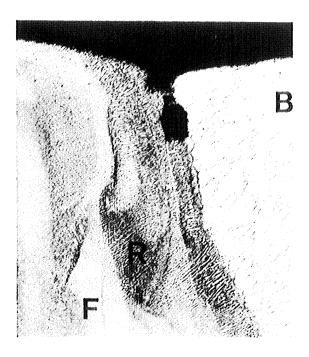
Metallographic section of pitting shown in Figure 4. Dark-etching (R) areas are remelted base metal unmixed with filler metal and are susceptible to pitting. Base metal (B) and light-etching undiluted Alloy 625 filler metal (F) resisted pitting.
